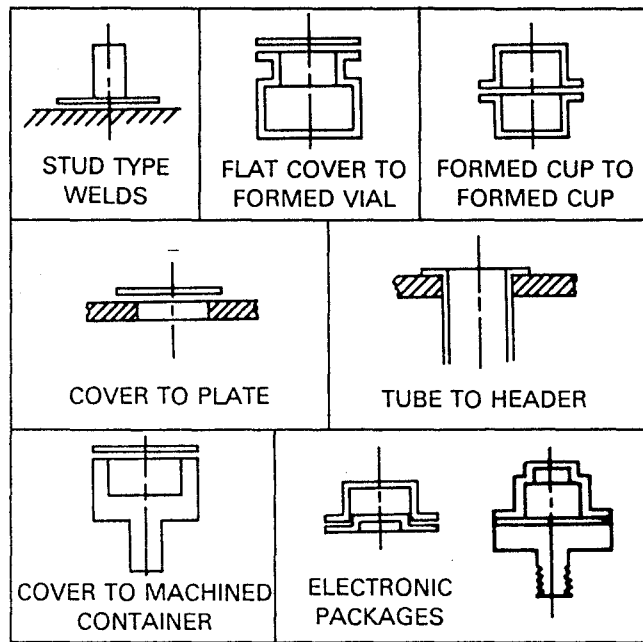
Typical Ultrasonic Ring Welding Applications
